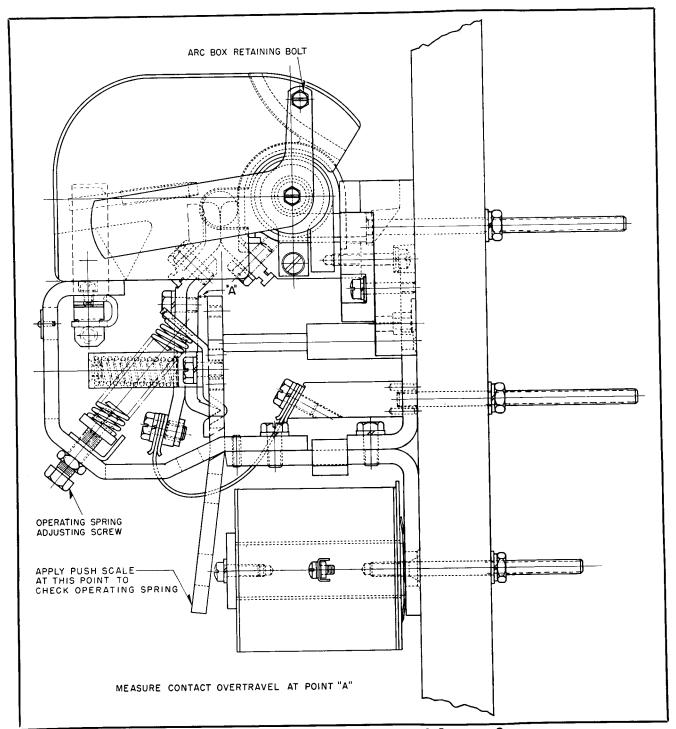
Sectional View of M-301 Contactor with Armature Open
